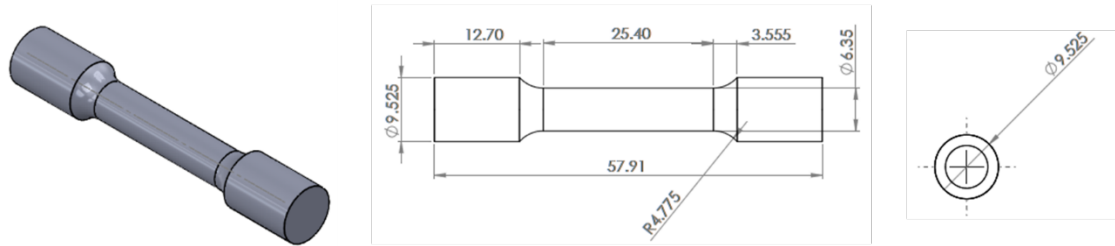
Representative tensile specimen that was extracted from the fabricated structures and used for mechanical testing. All measurements are in mm.
